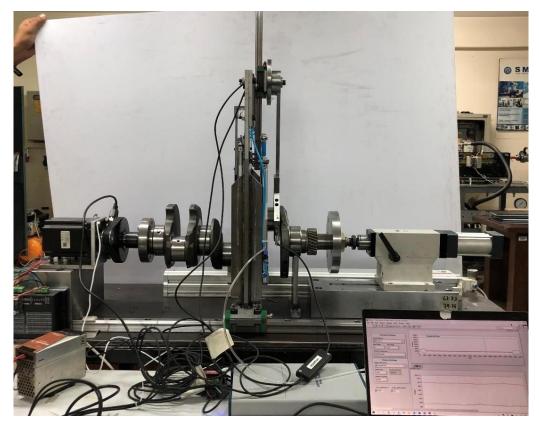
MANUFACTURED AND ASSEMBLED COMPLETE CRANKSHAFT MAIN BEARING RUNOUT MACHINE
